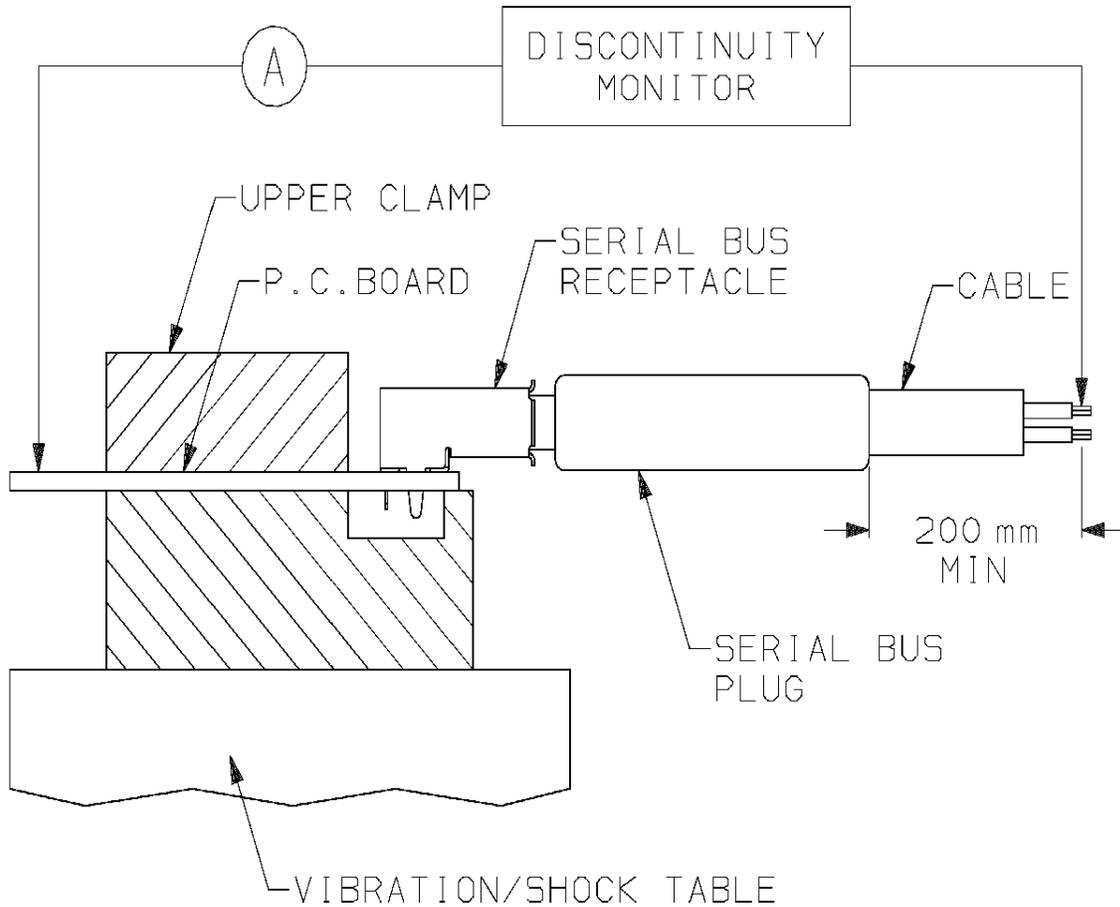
Vibration and Physical Shock Mounting Fixture
